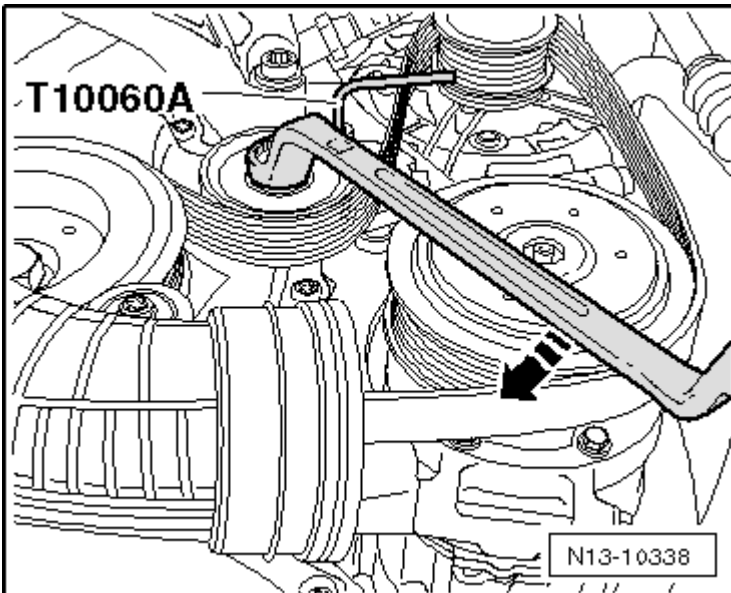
Identifying Wrench And Locking Pin -T10060 A-
